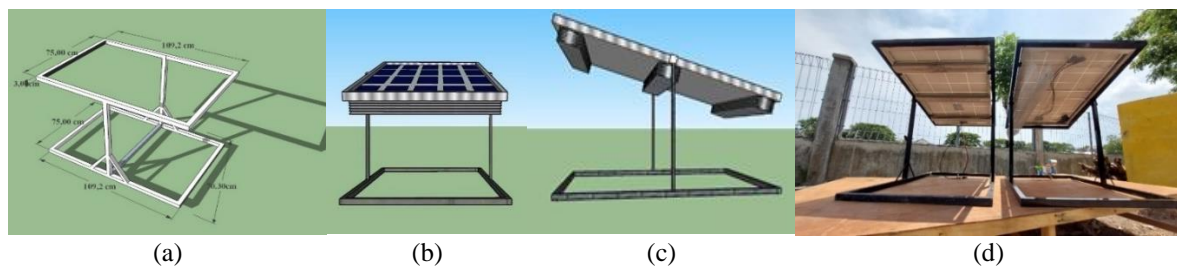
Design of solar panel in this study: (a) frame dimension, (b) front view, (c) side view, and (d) bottom view
